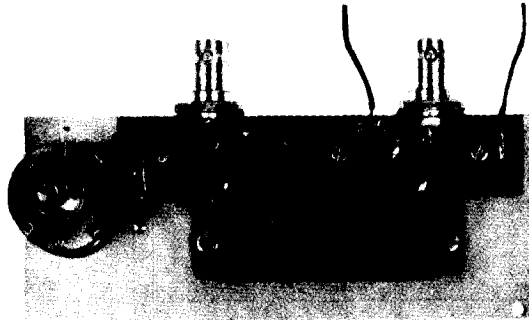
UHF POWER MODULE TEST FIXTURE PRINTED CIRCUIT BOARD
